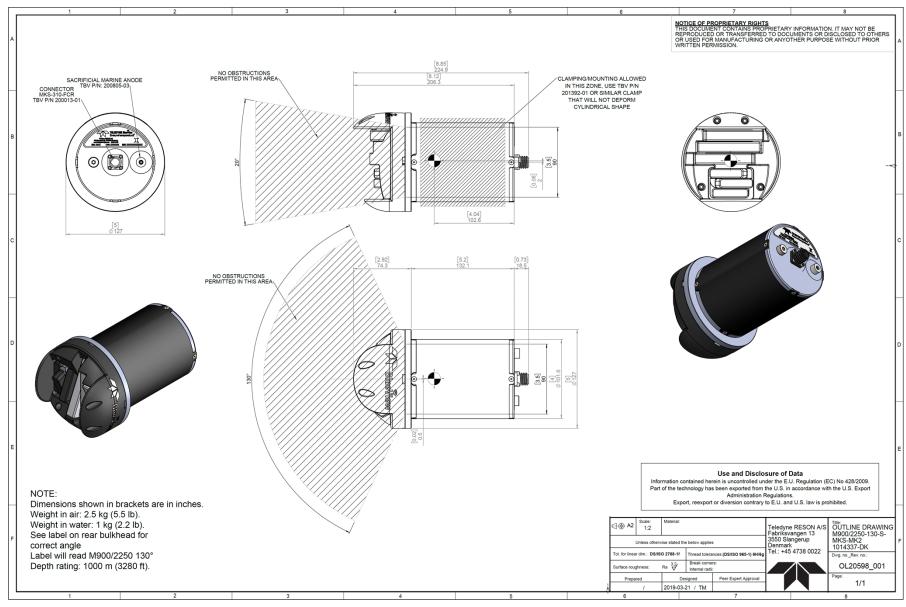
Outline: M900/2250 130° Mk2 - Shallow Water
